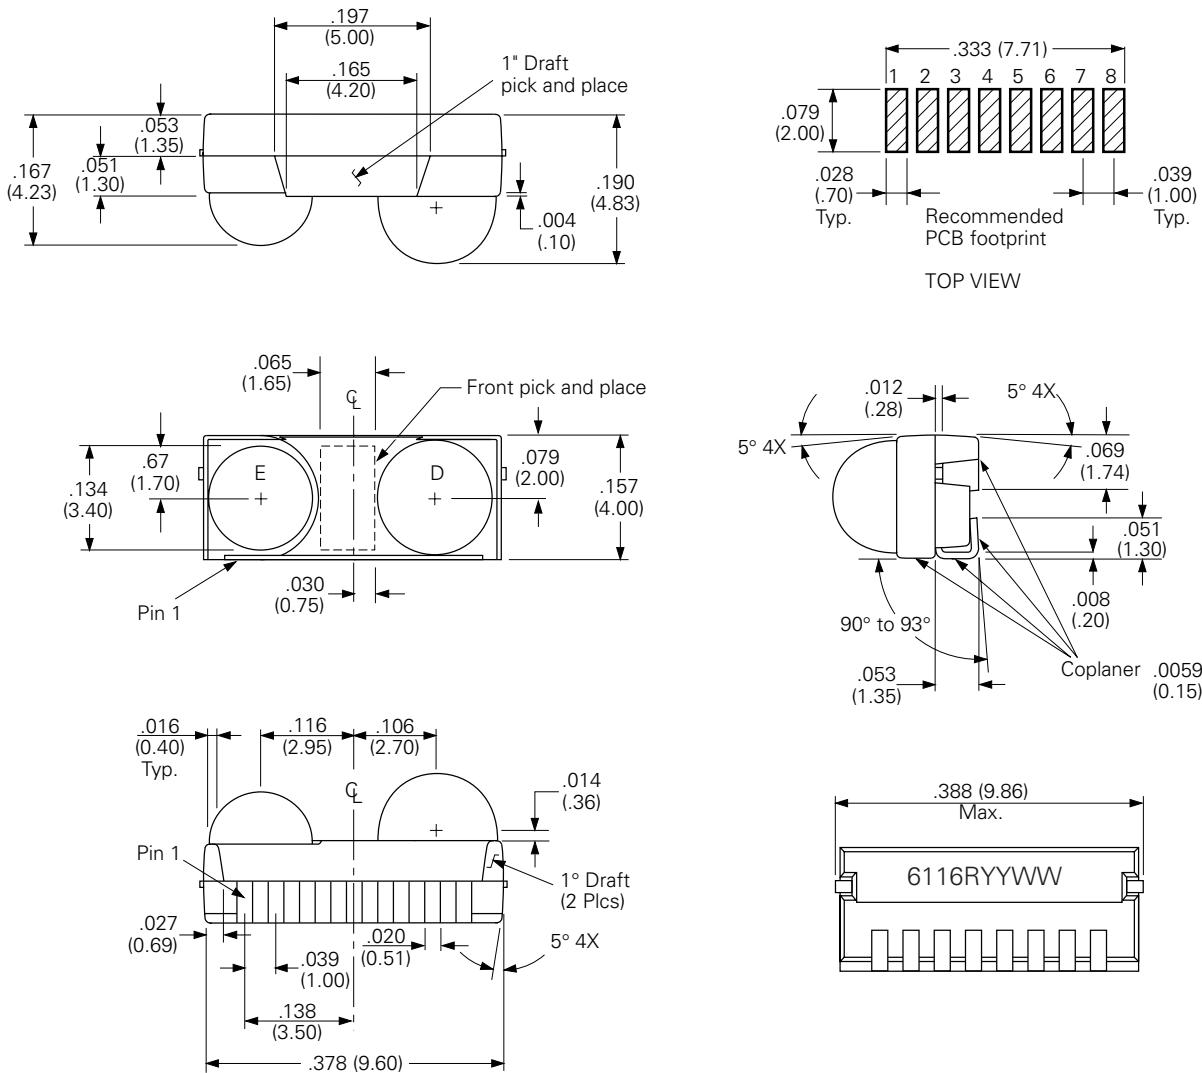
IRMS/T6116 Detail Drawings With Optional Side View or Top View Mounting
